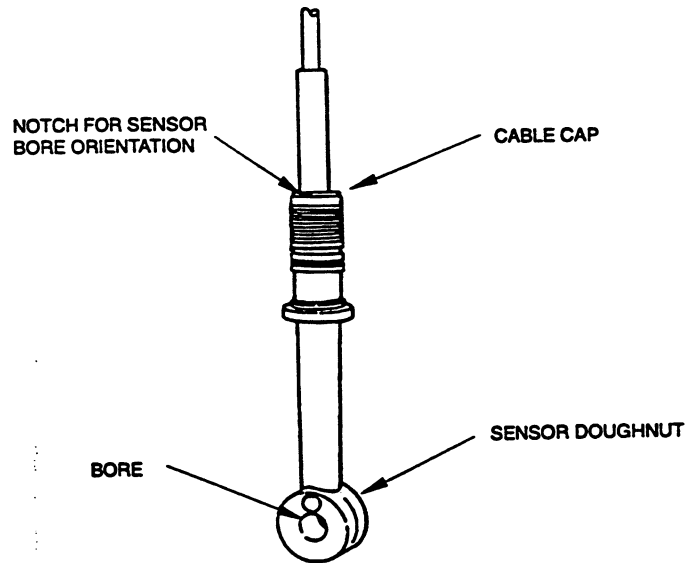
Sensor Types -NL, -SP, -LB, -RE, -BW, and -UT Mounting (Type -NL illustrated)
